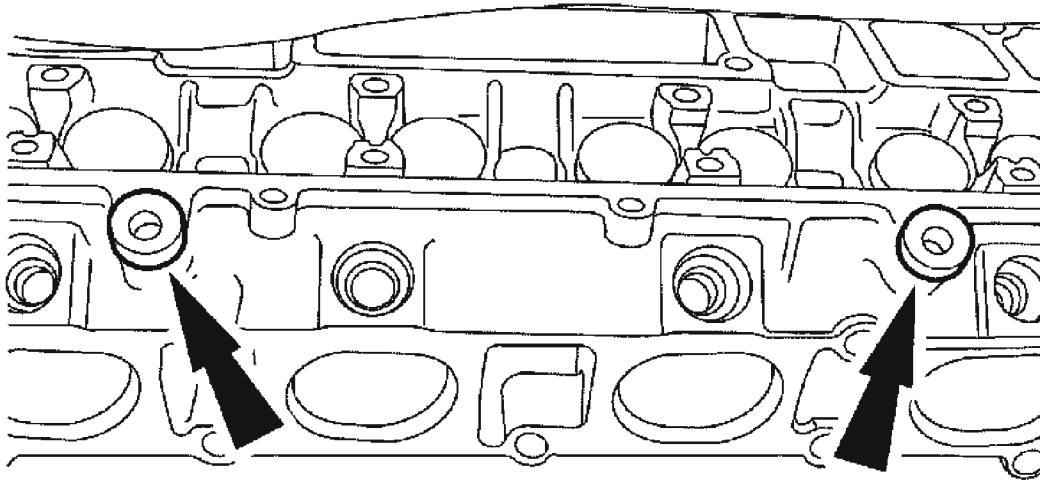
Removing Bolts And Fuel Rail With Fuel Injectors
